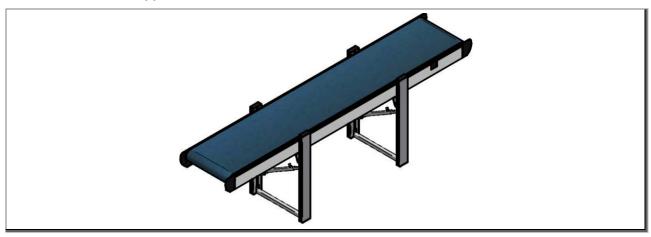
Parts list: Support AM 260 ZZ.982.0106.00
